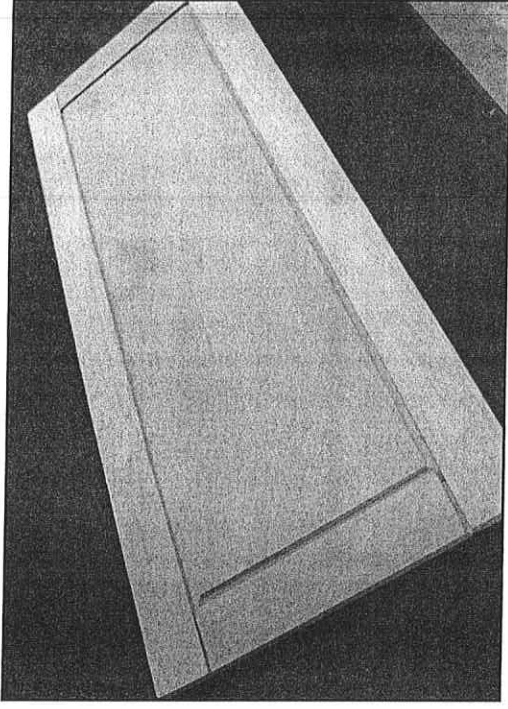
The panel can now be assembled. The rails and stiles should be glued and pinned with finish nails from the back side. The panel should not be glued so that it can float in the frame.
